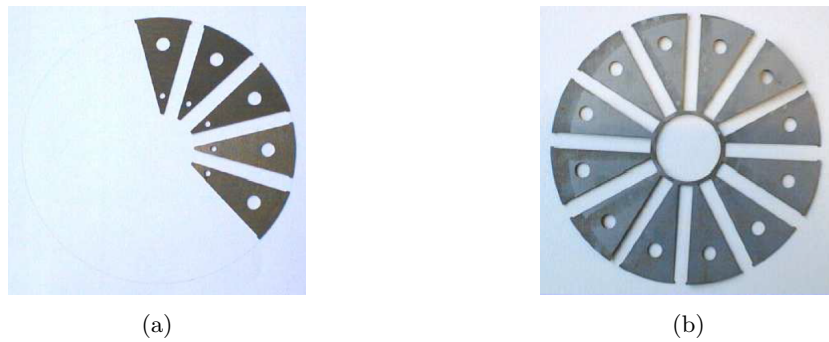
Laminated rotor part for second and third prototypes. a) Second prototype. b) Third prototype
